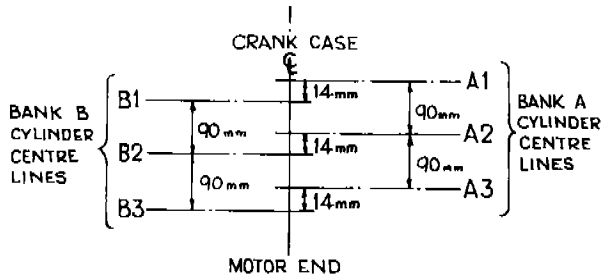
CYLINDER DISPOSITION OF SIX CYLINDER VEE REFRIGERANT COMPRESSOR.
